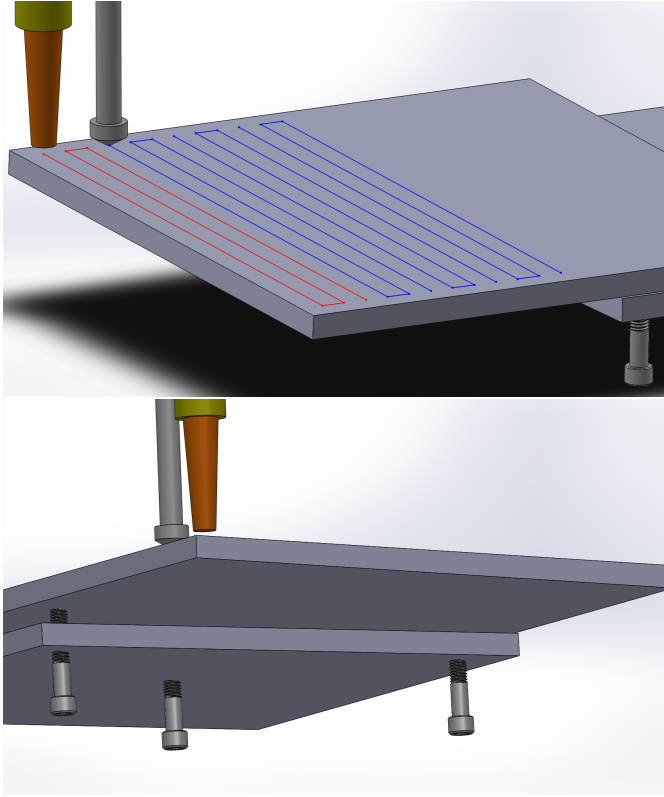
CAD models for the experiment with three-pass paths outlined in red and blue. In the bottom view, the three-point-of-contact screw adjustment is shown.
